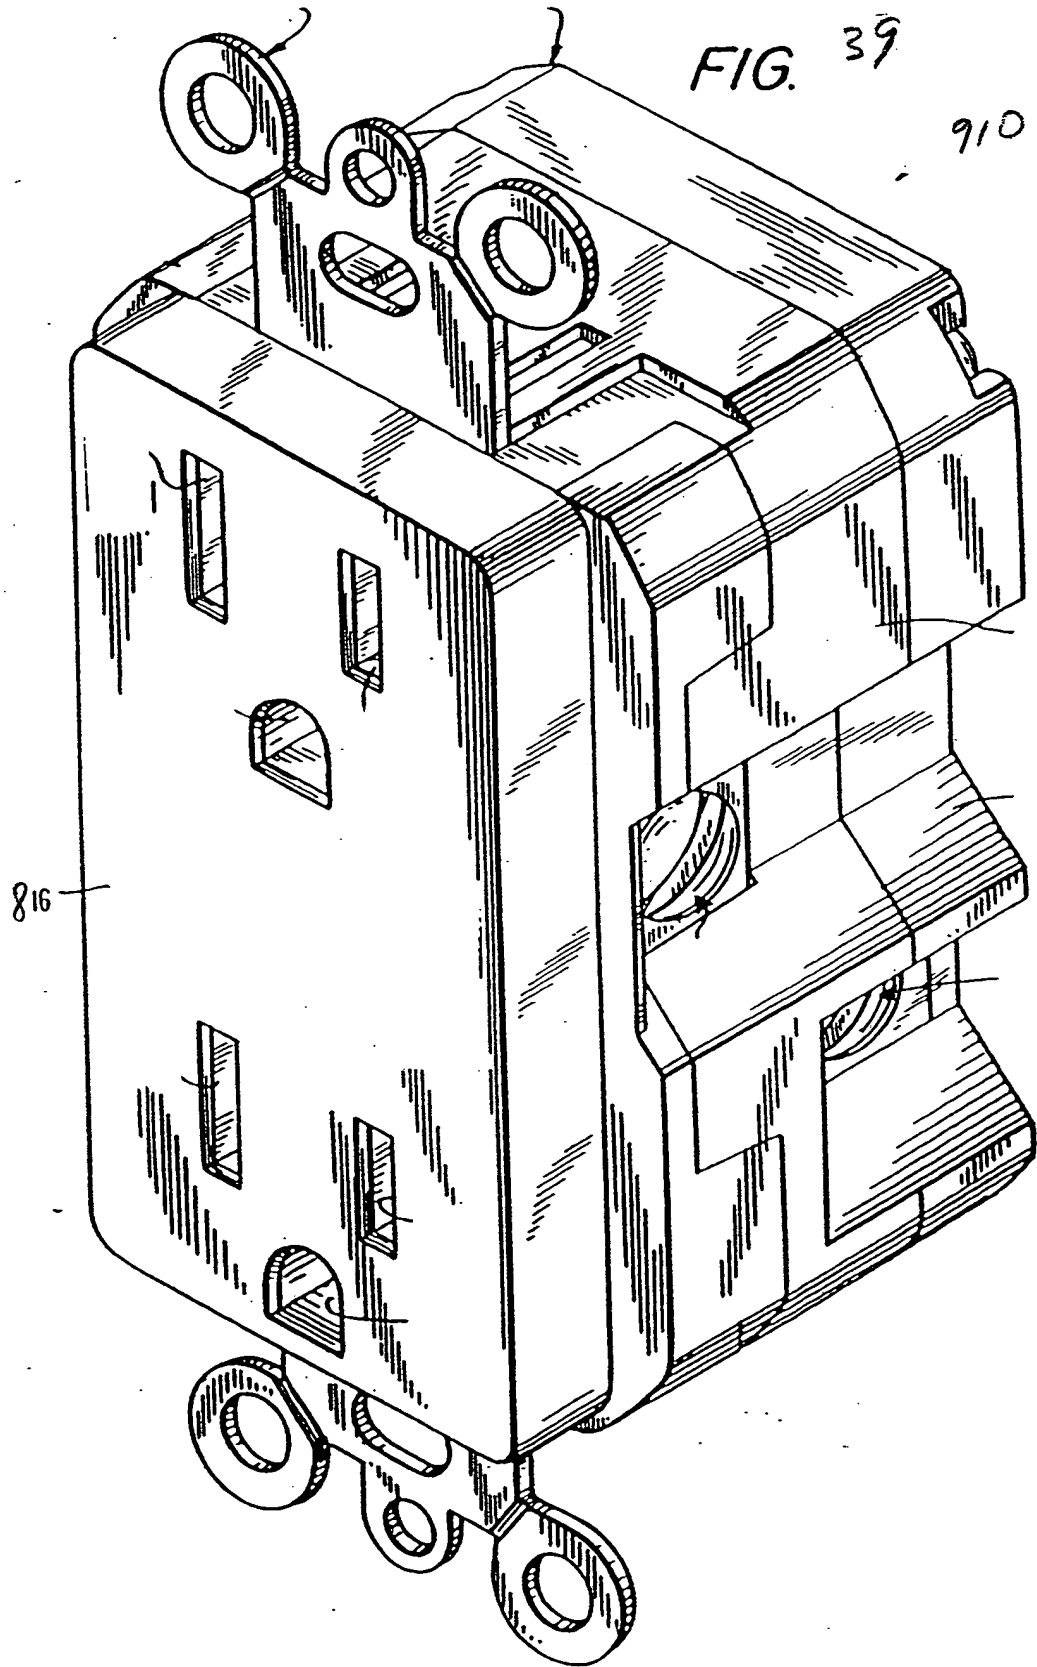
is a perspective view of the mechanical assembly 816, showing the top, front, and side views. The assembly includes a main body 816 with various openings and features. The top surface has three circular features with central openings. The front face has several rectangular openings, some of which are partially covered by internal components. The side of the assembly shows a series of rectangular openings, some of which are also partially covered. The bottom of the assembly has three circular features, each with a central opening, arranged in a row.
